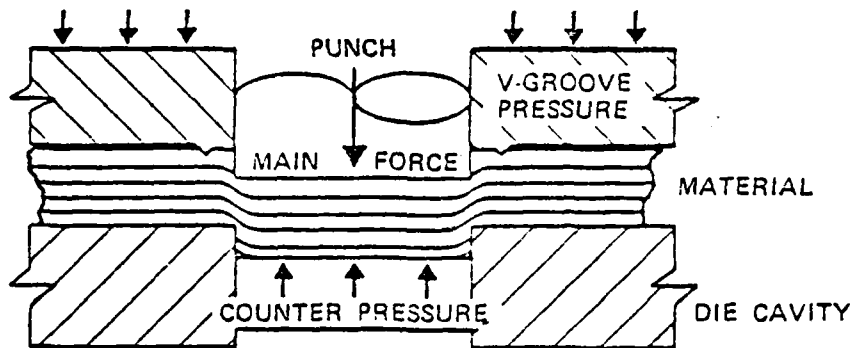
Cross-sectional view of a fine blanking die fabricating a part.
